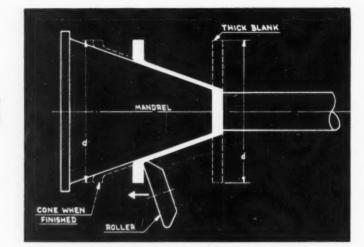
In Floturn process, diameter of blank does not change as roller coldflows metal blank to shape of mandrel on lathe spindle.
